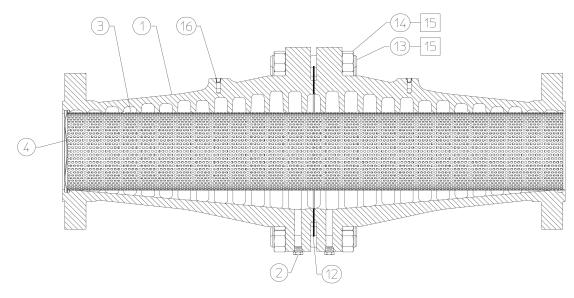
Fisher WhisperTube Exploded View, NPS 2 through 6
